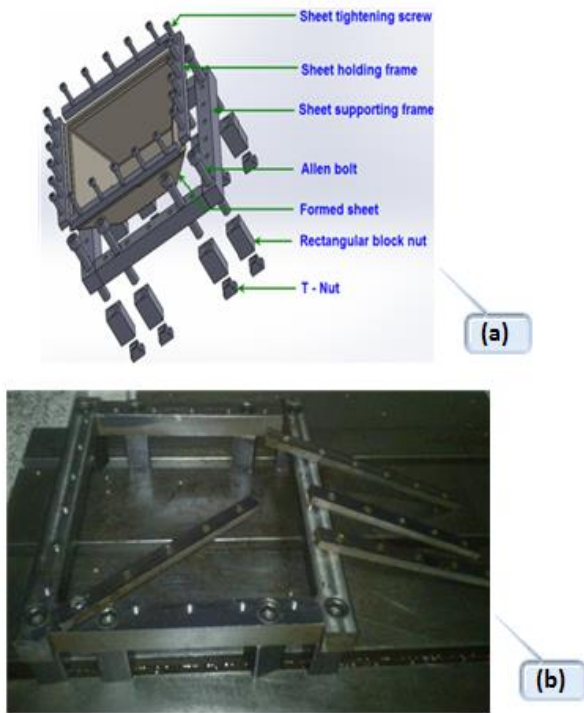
Conventional fixture a) CAD model b) fabricated fixture
